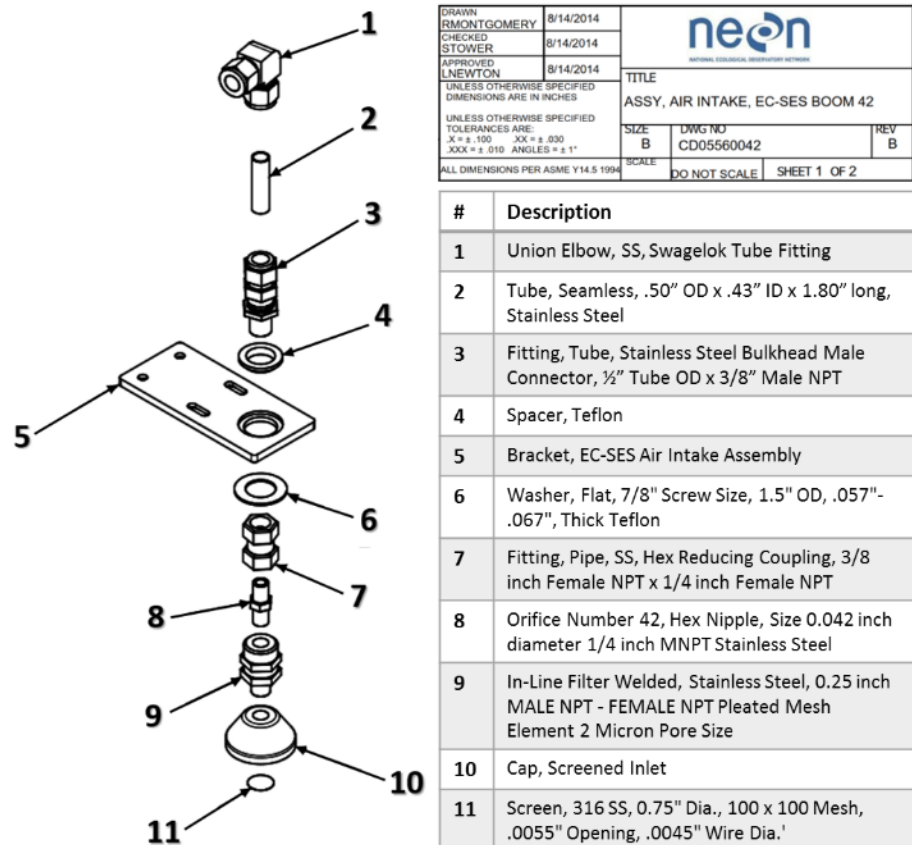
Exploded View of Unheated Air Inlet for ECSE System.
